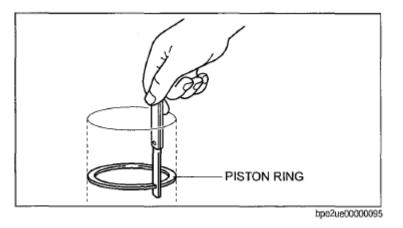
Measuring Piston Ring End Gap Using Feeler Gauge
